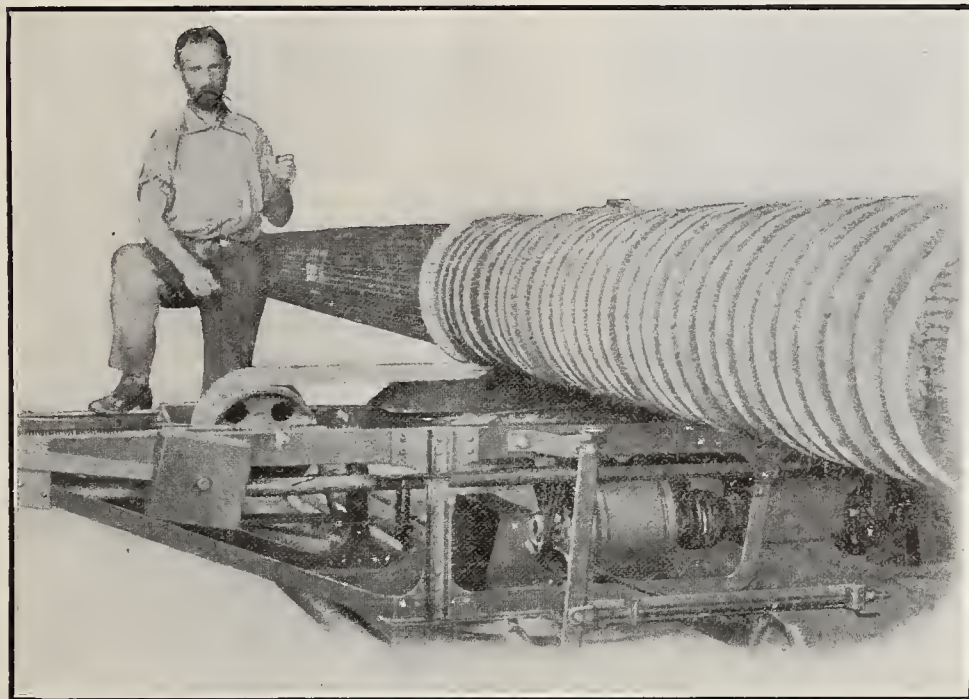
REAR VIEW OF POLE-MAKING MACHINE.
